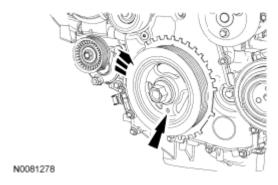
Locating Crankshaft Pulley Bolt Courtesy of FORD MOTOR CO.
